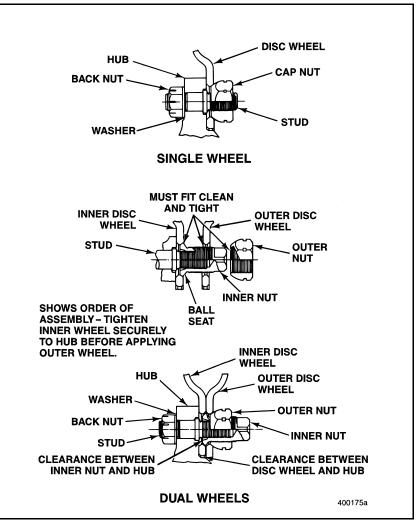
Disc Wheel Assembly (Stud Piloted Ball Seat)
